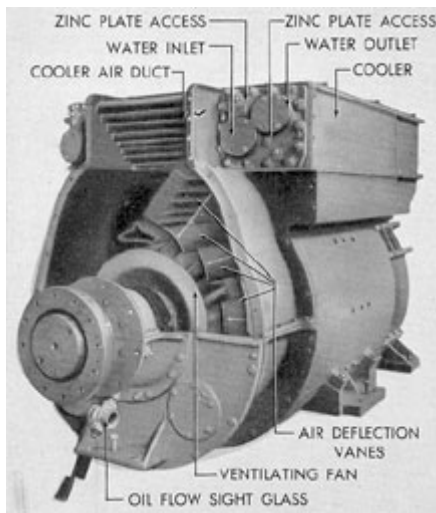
Coupling end view of G.E. main motor, flat cover plate and air duct cover removed.
